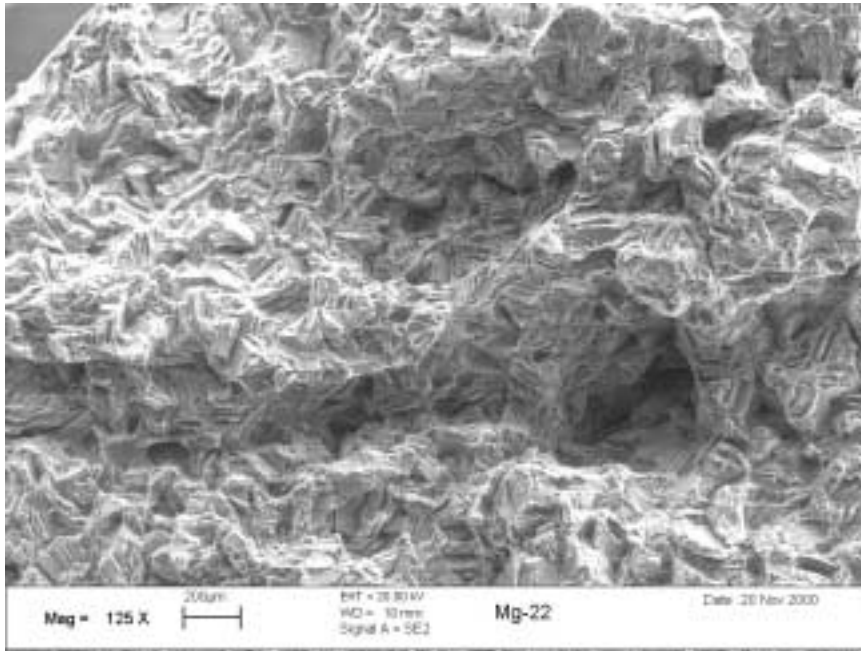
Fracturegraph of the 16 mm diameter sample after 4 h of aging at 210°C
